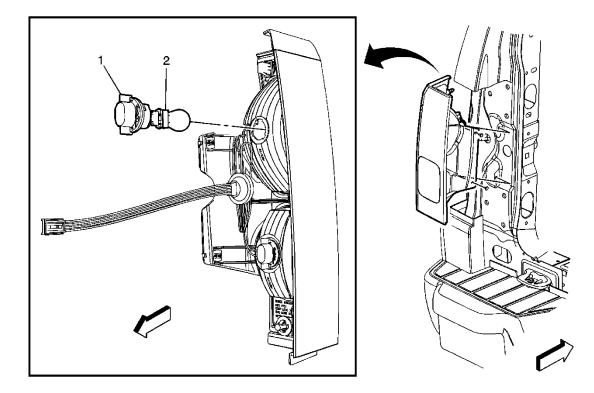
Tail Lamp Assembly Replacement Courtesy of GENERAL MOTORS CORP.
